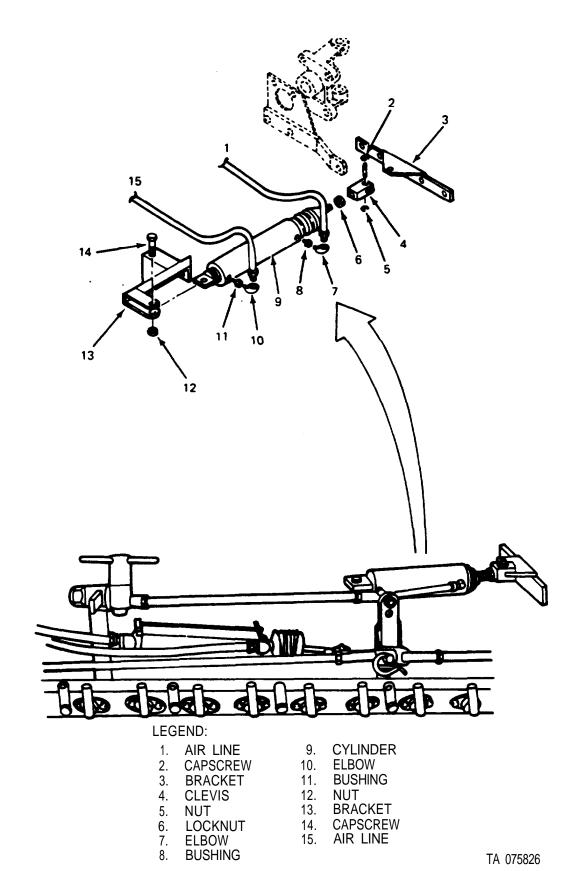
Remove/Install Bar Shifting Control Cylinder.
